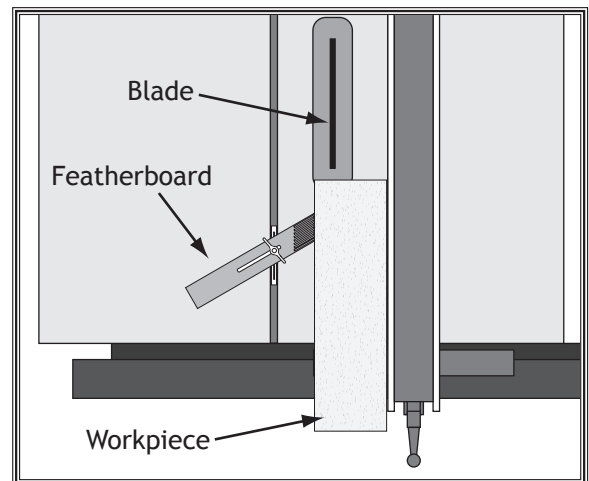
Featherboard installed in miter slot and supporting workpiece for ripping cut.
